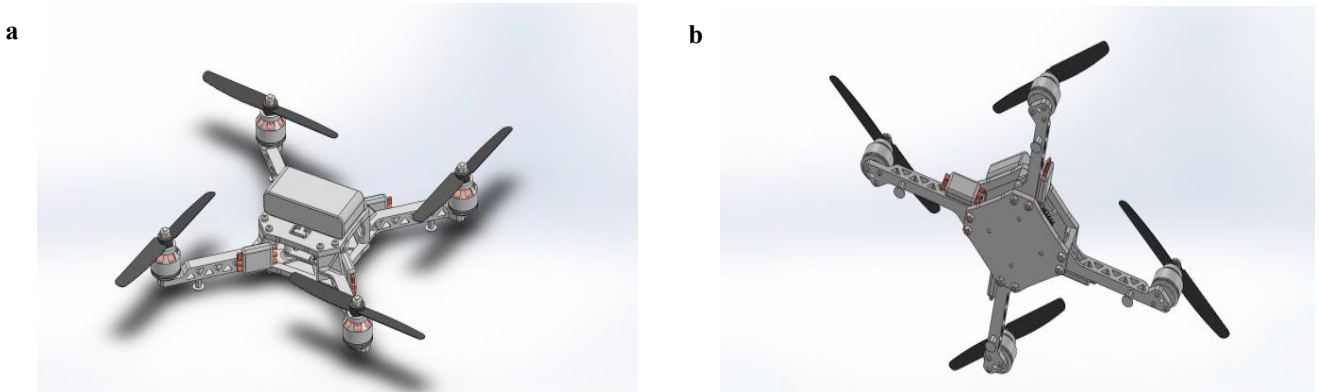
Drone design in SolidWorks (a) isometric view; (b) bottom view.
